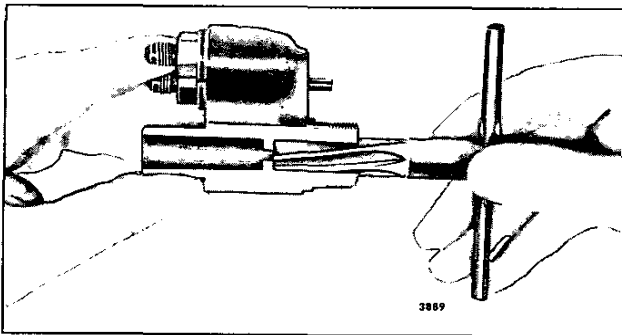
Cleaning Injector Body Ring with Tool J 21089
